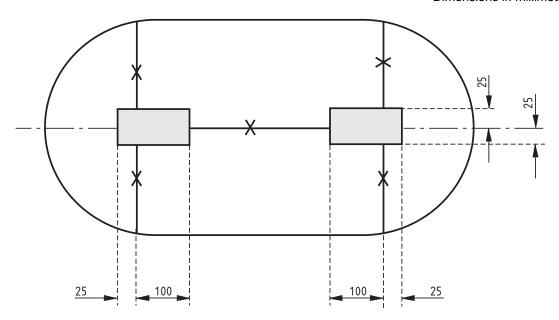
Extent of spot-radiography at weld intersections
